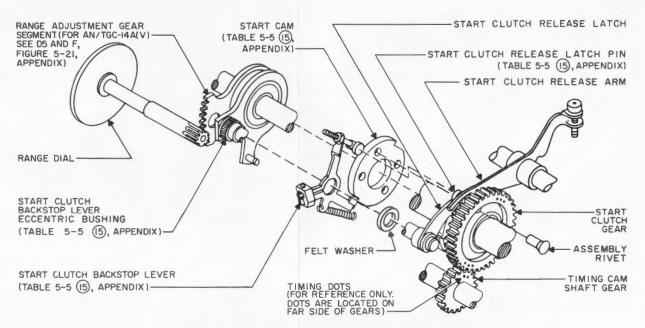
Start Clutch Release Mechanism, Exploded View
